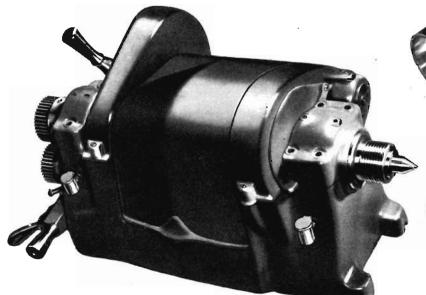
Headstock for 16-inch Swing South Bend Lathe
